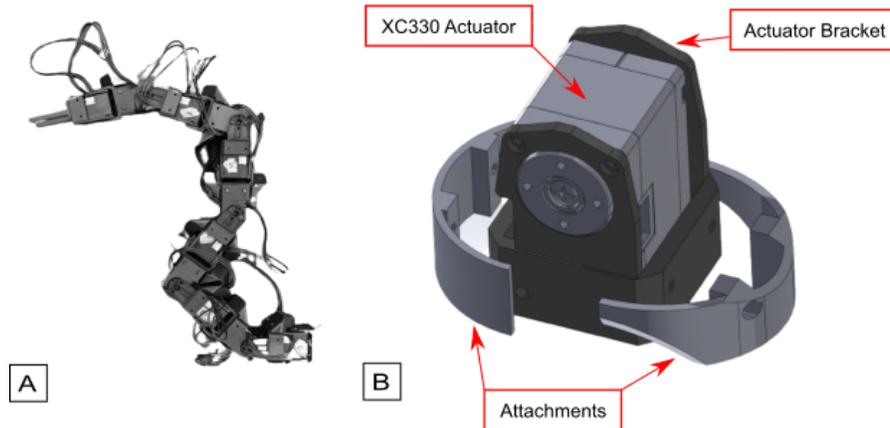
(A) COBRA Mini Full Body. (B) Close-up of Single Module with XC330 Actuator, Actuator Bracket and Interchangeable Attachments. These attachments were used to rapidly experiment with different exteriors to determine the best shape for sidewinding and tumbling.
